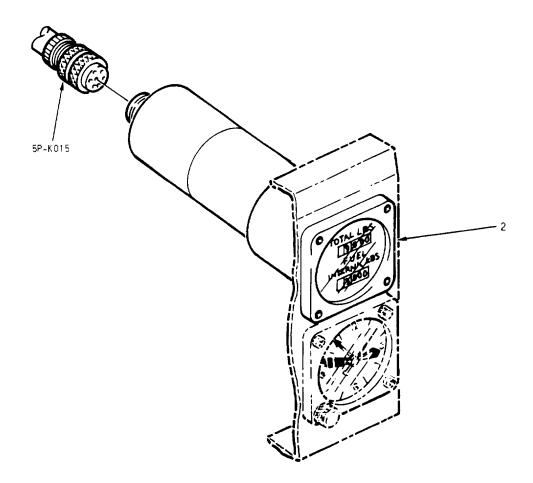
Fuel Quantity Gaging System Component Locator (Sheet 2)
